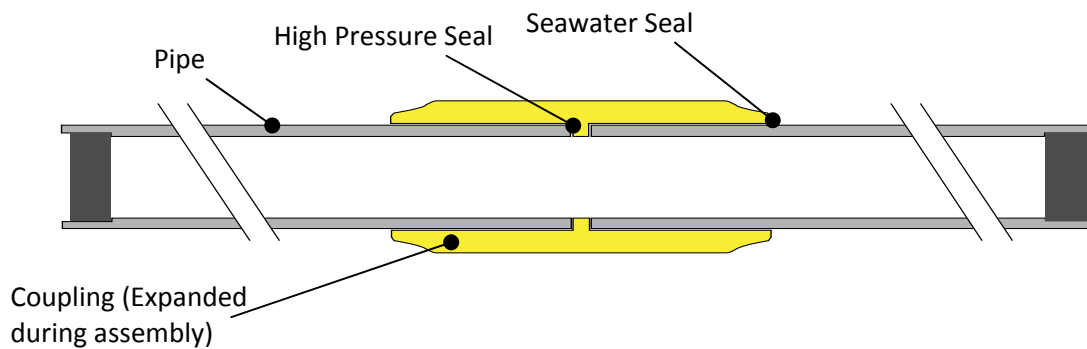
Cross-Sectional Diagram of Shrink-Fit Connection
